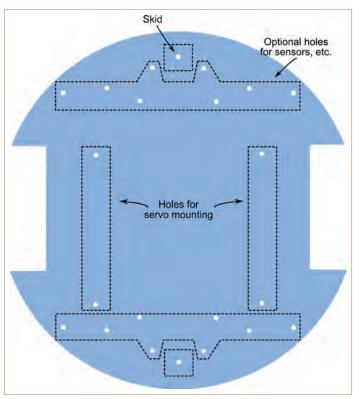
Only four holes are critical for the bottom deck: the two sets marked Holes for servo mounting, and the front and rear Skid. The rest are optional for sensors and other accessories you may want to add later.
